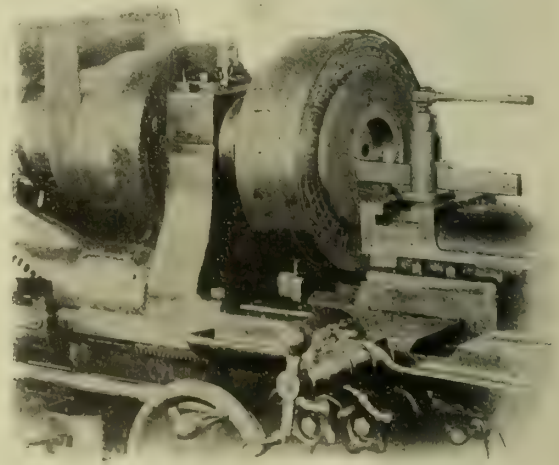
A Rotary Magnetic Chuck in use on a Lathe.
